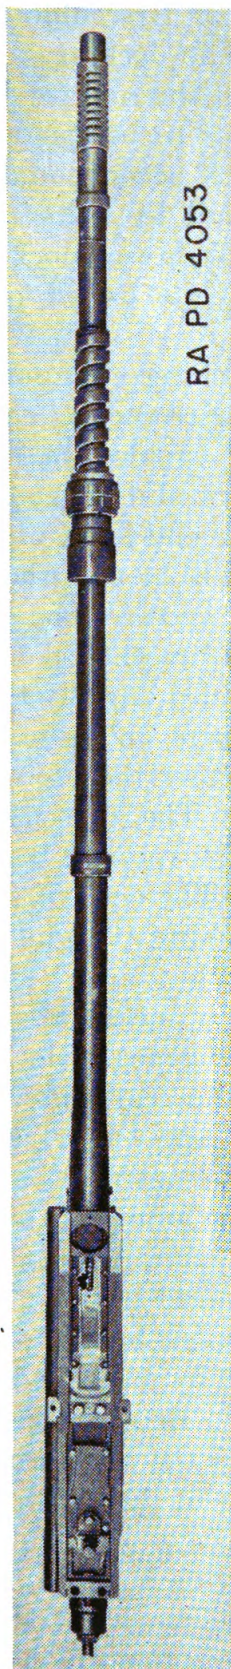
20-mm automatic gun M2, general assembly, bottom view.
